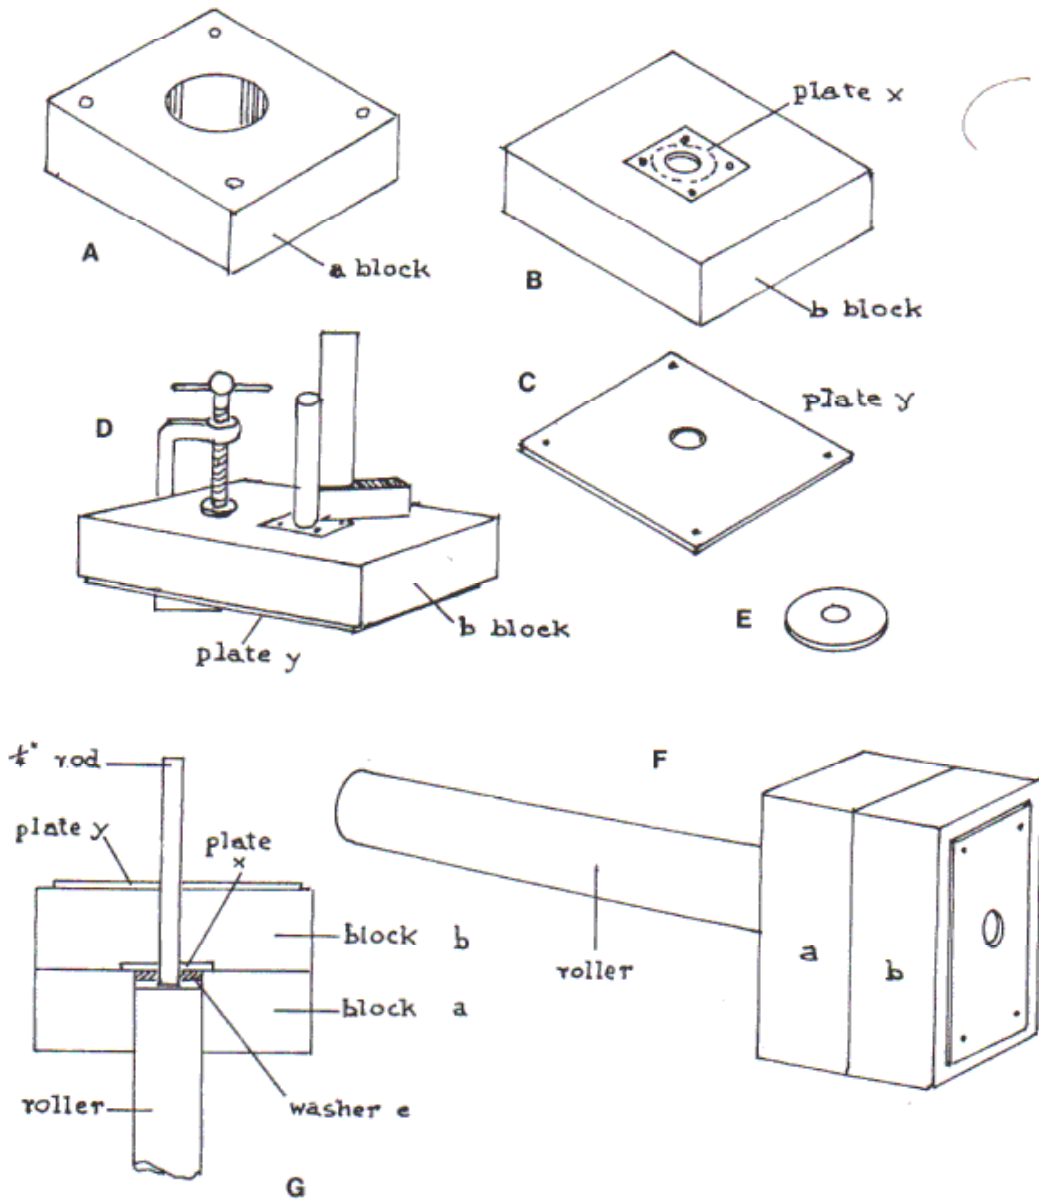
explains, in six sketches, a very simple way to make a jig that will enable one to drill holes accurately in the end centre of a wooden cylinder — the roller. Fig. 7.16A shows a block of wood with a central hole drilled to fit the roller tightly. For this the adjustable wood drill shown in Part II, chapter 17, Fig. 17.1. should be used. The size of the block is unimportant; only the thickness matters, and that should be at least 1 in (25 mm) thick, but  $1\frac{1}{4}$  in (31 mm) or  $1\frac{1}{2}$  in (38 mm) would be better. It must be very carefully marked, preferably from both sides, and the hole should be drilled from both sides to ensure a perfectly vertical entry. It need only be perfectly vertical in relation to one face, and that should be checked with a square while a roller is forced in the hole. Error can be corrected by planing the block. If not successful, the hole can be drilled again or another block used. The face used in checking for verticality is the one that must be made to contact the block, shown in Fig. 7.16B, when they are joined together later. Block *a* also has four holes in the corners, which will be used to join it to block *b*.
